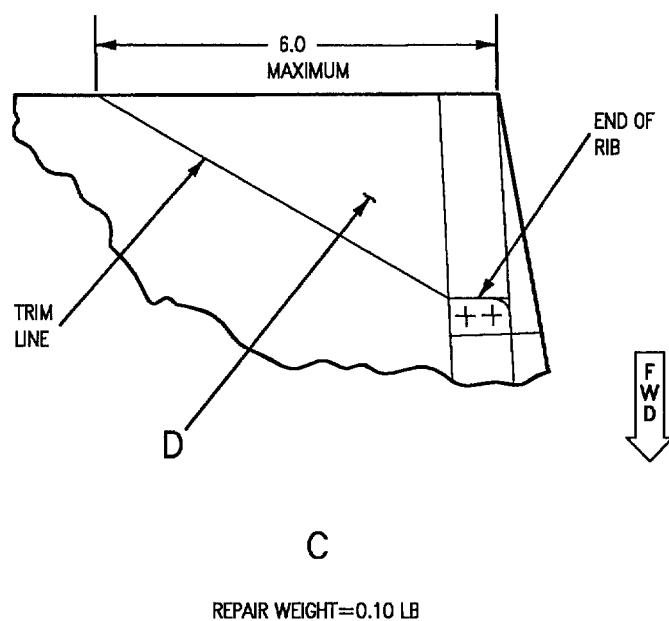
Trailing Edge Inboard or Outboard Corner Repair Without Rib Fabrication
